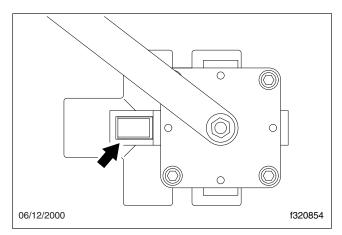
, Exhaust Flap Location (height-control valve with integral dump port)
